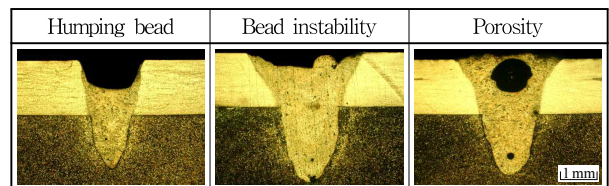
Typical weld defects of magnesium alloy in laser welding
